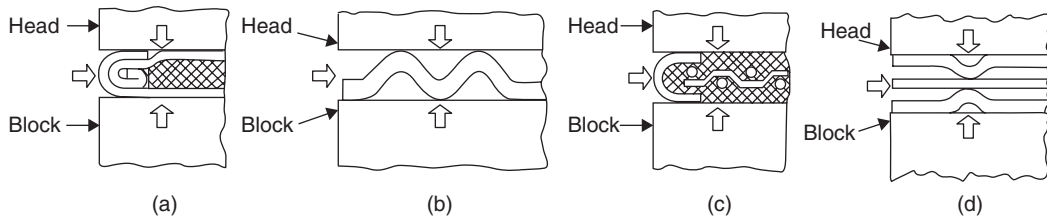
Types of cylinder head gasket: (a) metal and asbestos layers (b) embossed steel sheet (c) metal-cored composition materials (d) multi-layer steel
